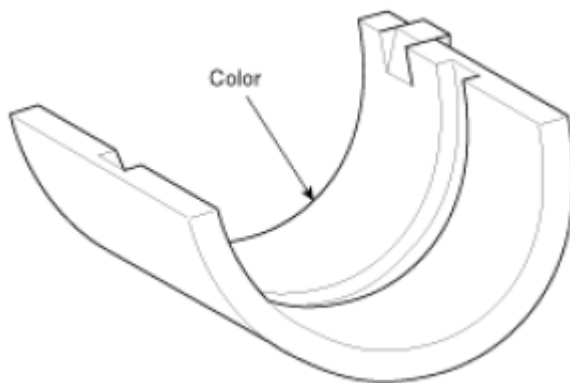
Identifying Crankshaft Bearing Identification Mark
